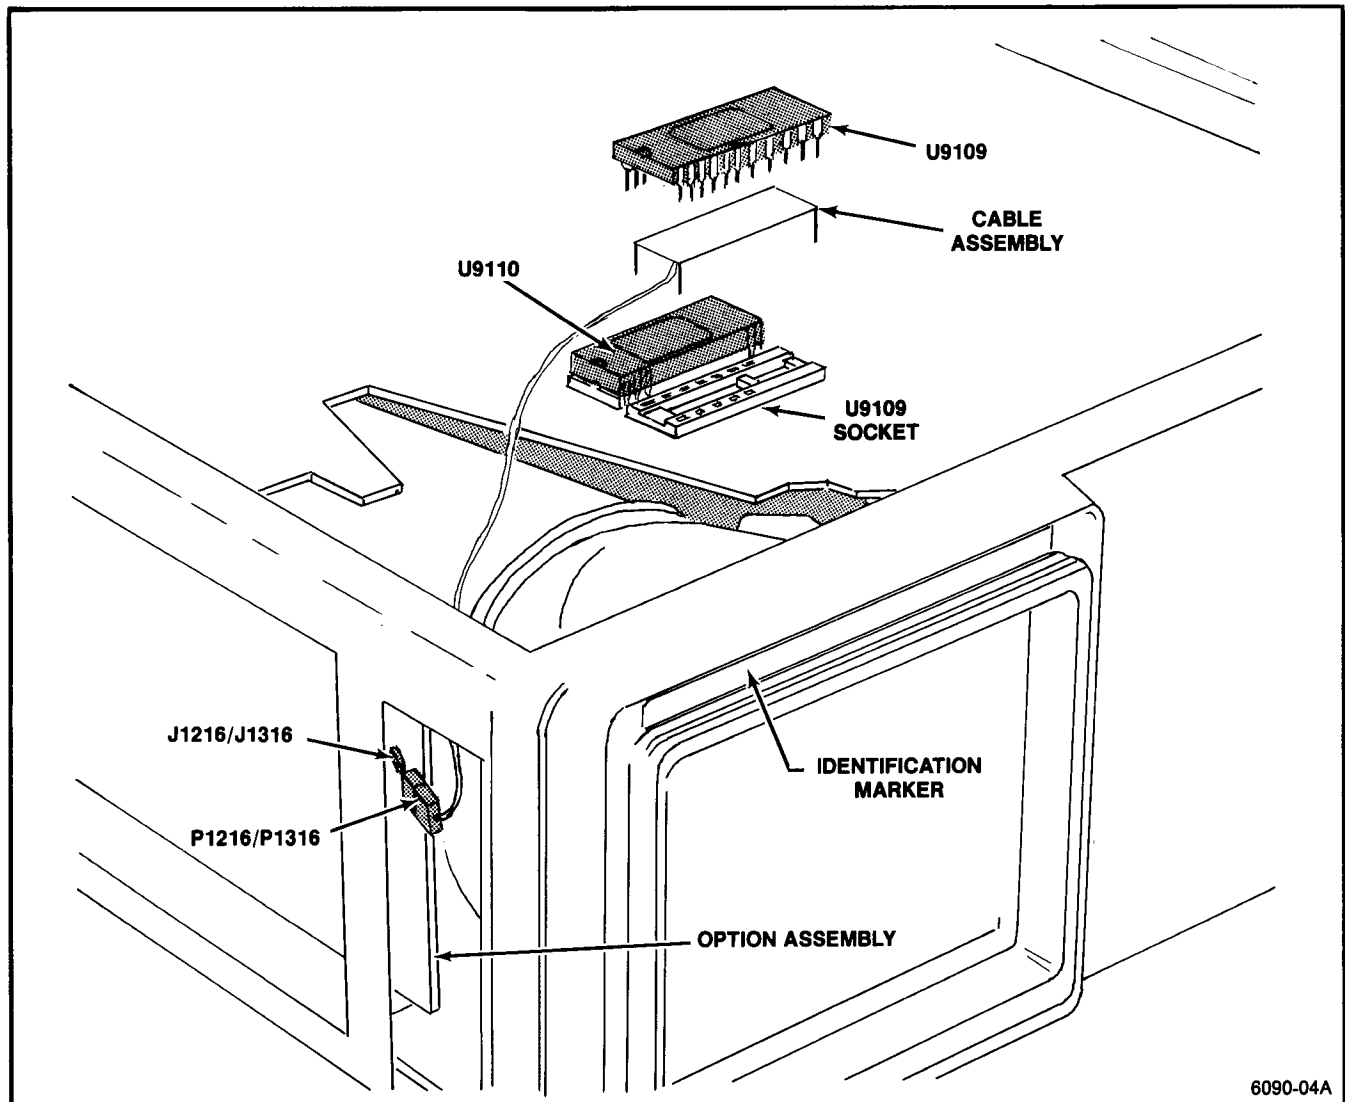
Locations of the ROMs, cable assembly, connector, and identification marker.
